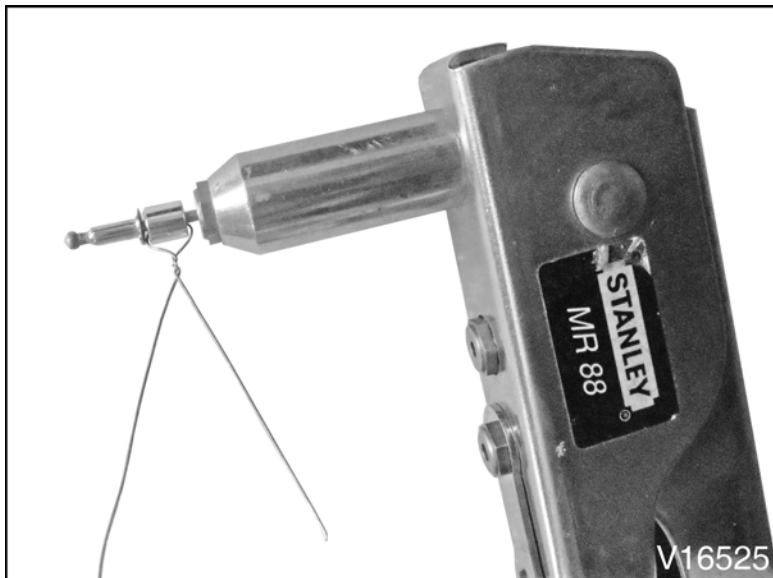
Rivet Gun and Rivet/Spacer Assembly
